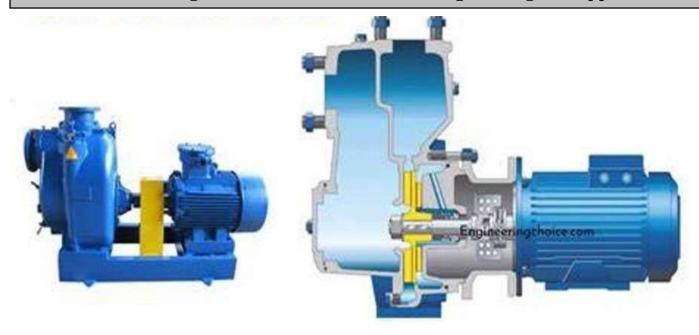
Self-Priming Centrifugal Pump and sectioned view of its Casing [5].
